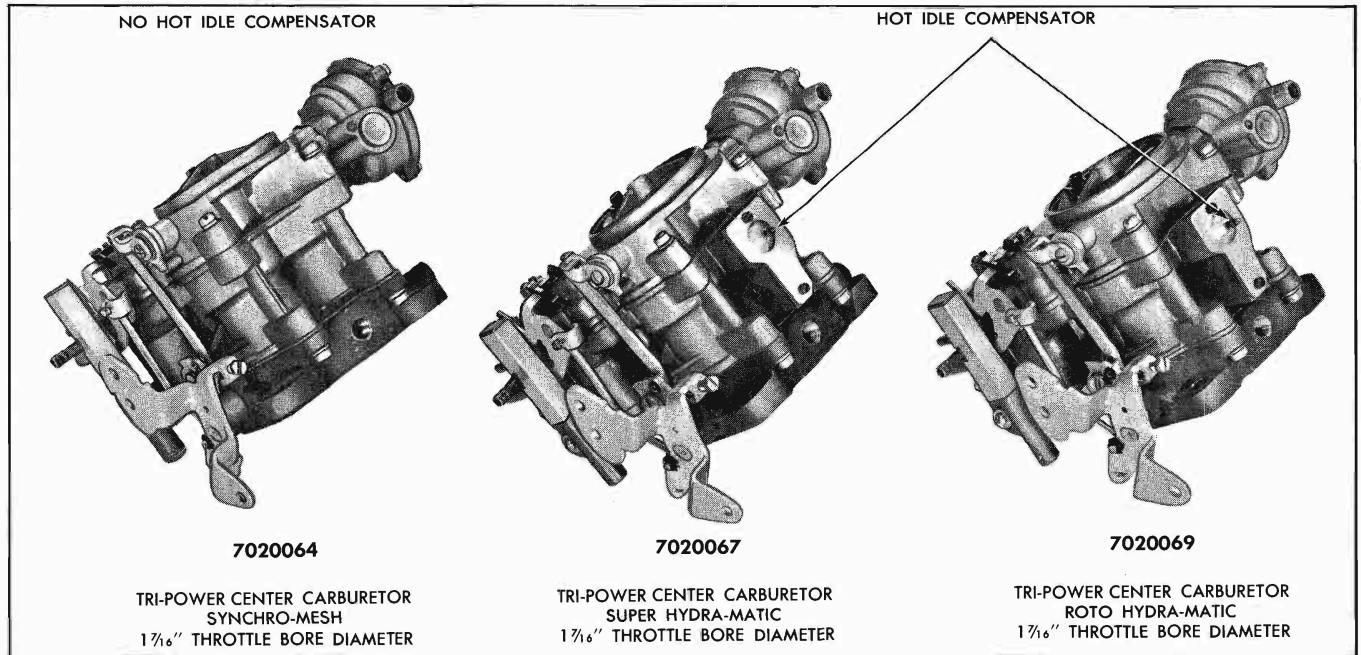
B-62 Comparison of 7020064, 7020067 and 7020069 Carburetors Showing Hot Idle Compensator None Are Equipped With Throttle Return Check
